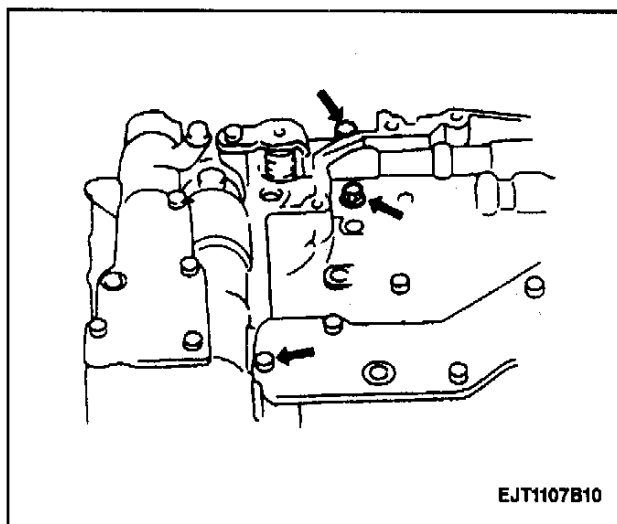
Installing Three Bolts to Lower Valve Body (03-72LE, 4-Speed)
